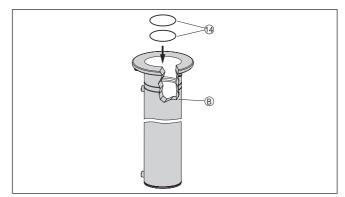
Insert the sealing rings inside into the scintillator cooling
